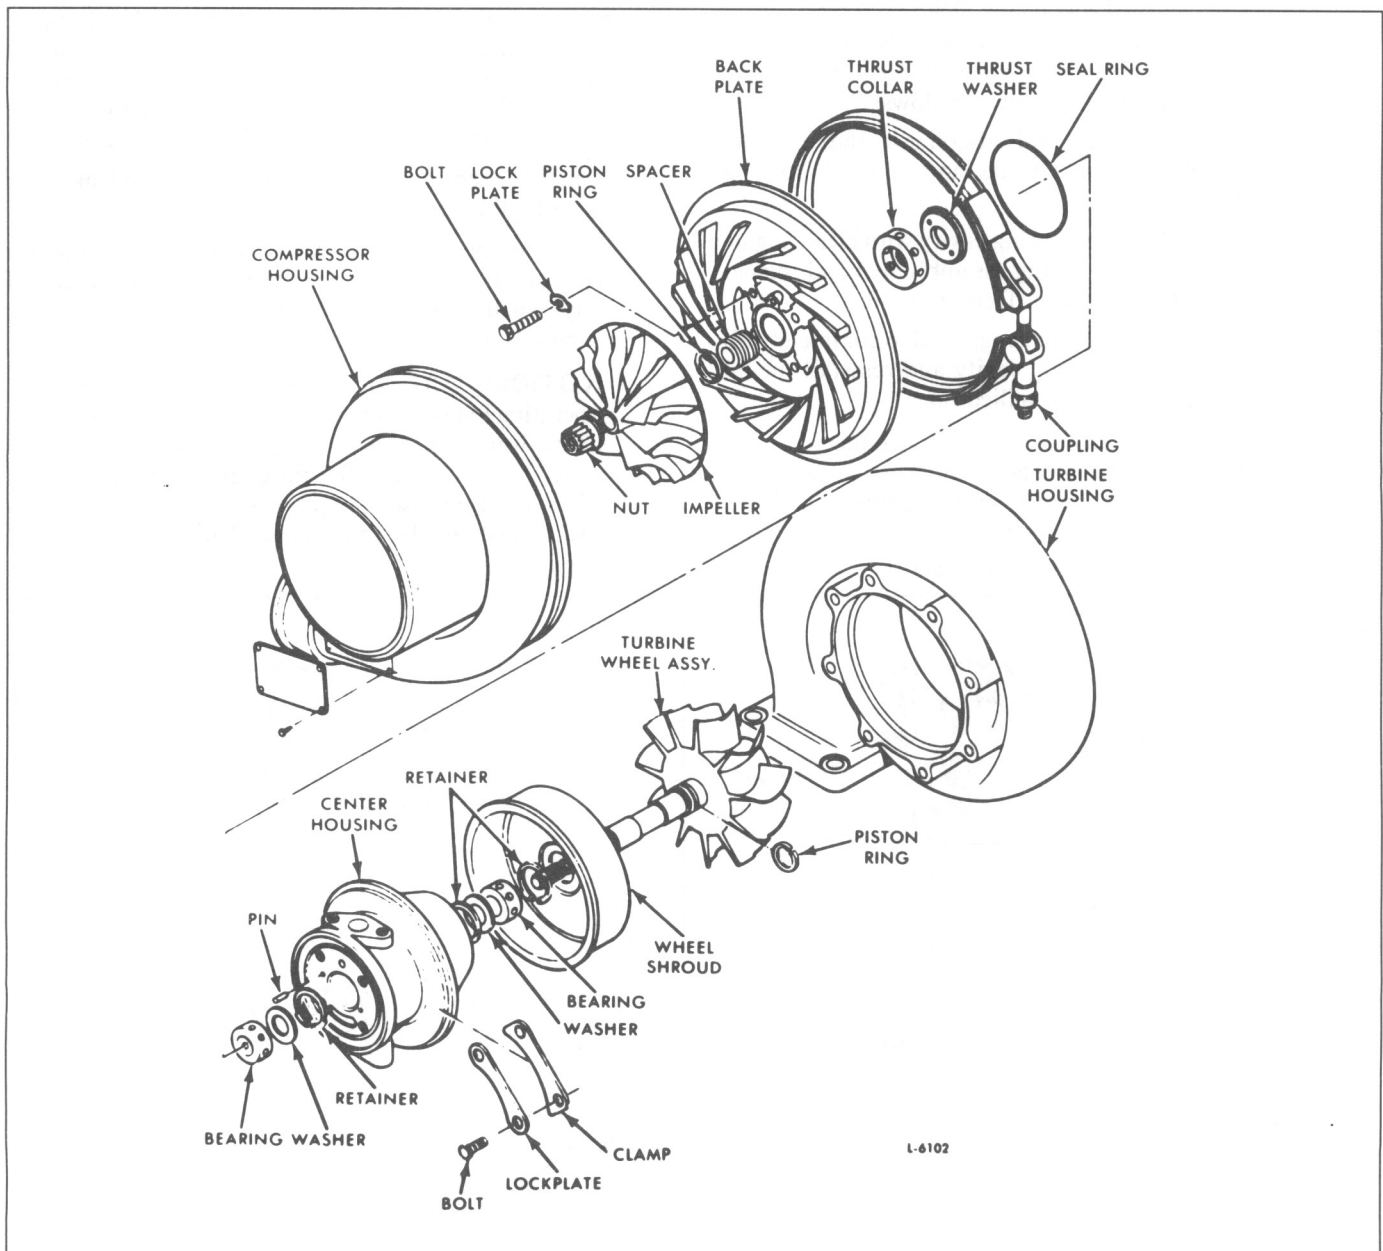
A - TH08A Turbocharger Details and Relative Location of Parts
